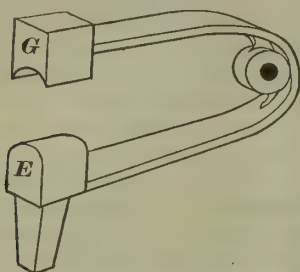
The Holliper, Presumably the Invention of Tubal Cain.
